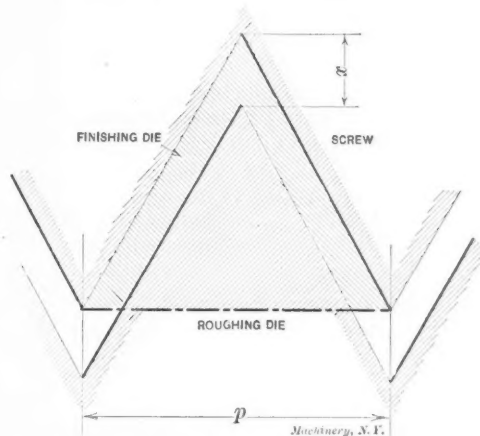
Diagram of Metal Removed, Standard Sharp V Thread.
